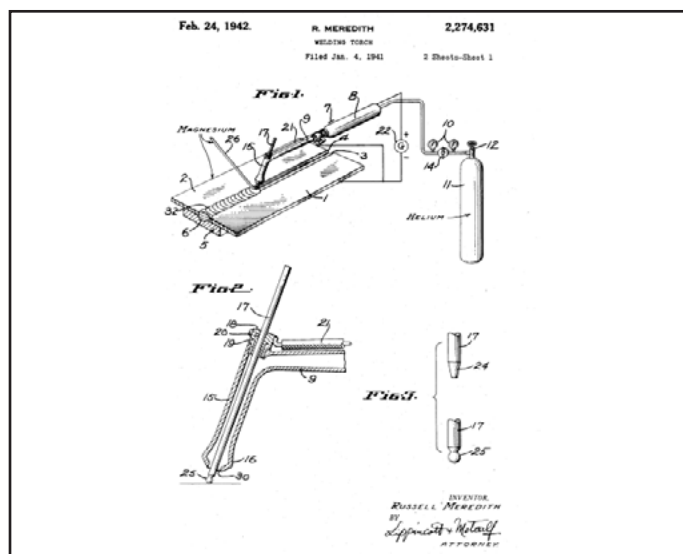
Patent by R. Meredith; no. 2274631 "Welding Torch"; 24.02.1942 [20]
